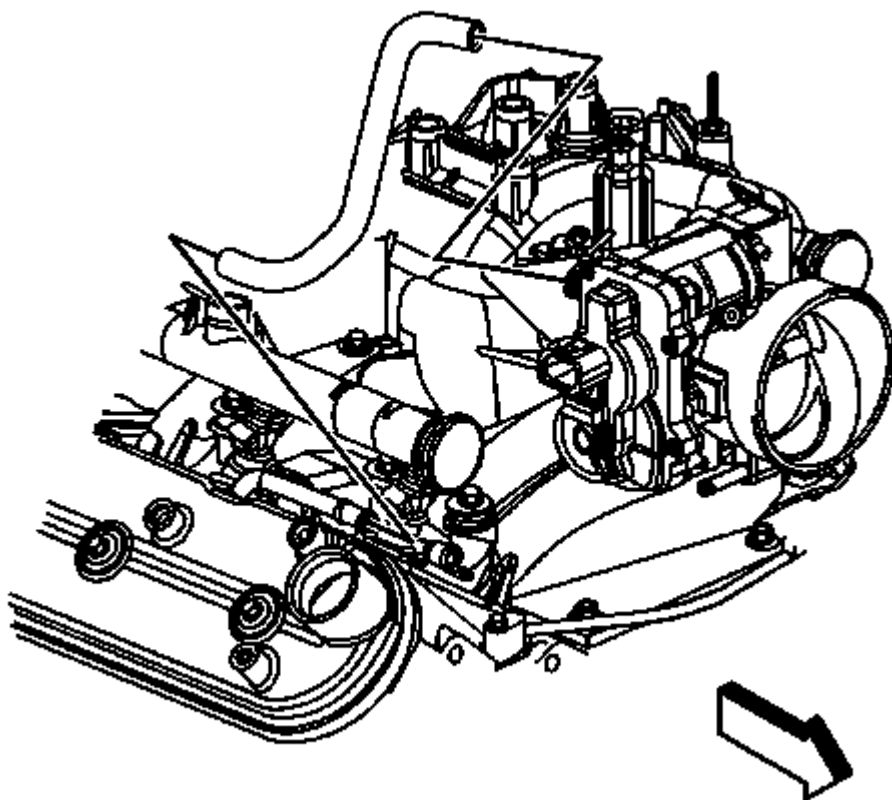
Valve Rocker Arm Cover Onto Cylinder Head
